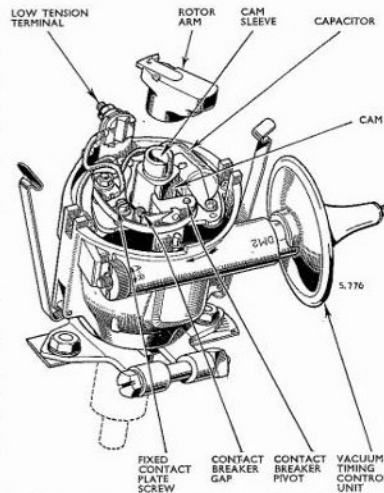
Contact breaker adjustment and details (D.M.2 type distributor)
